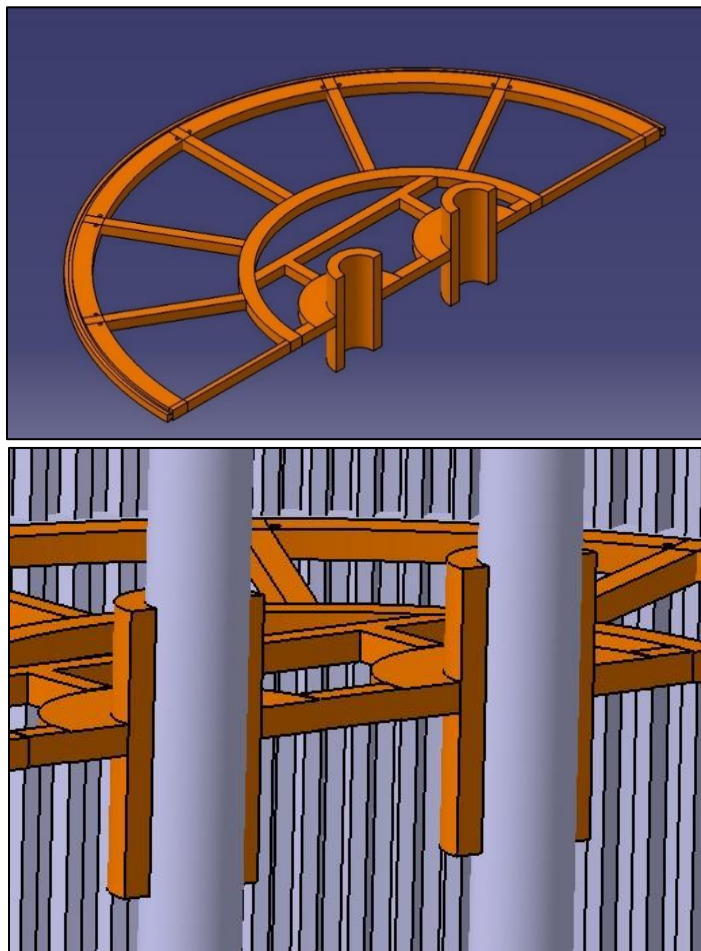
The Isometric View of ISS Boom Fixtures Semi Cylindrical Block Version (Top) and the Fixture with the ISS Booms in Position (Bottom).
